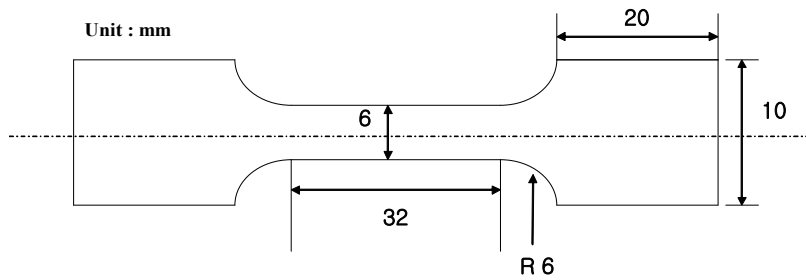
Schematic drawing of Compressive and tensile specimen.
